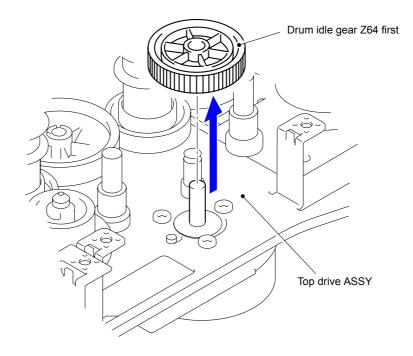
Gear position: Refer to "Top drive ASSY."
